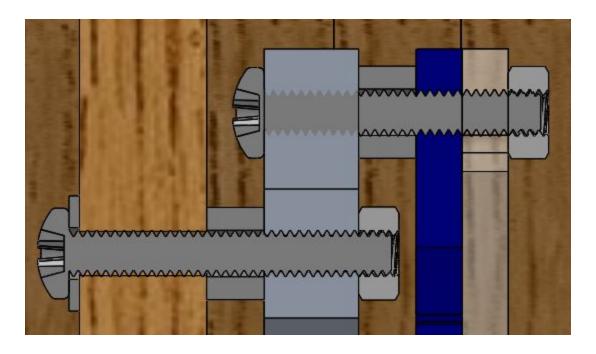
Section view of lazy susan bearing and weather sheet assembly
